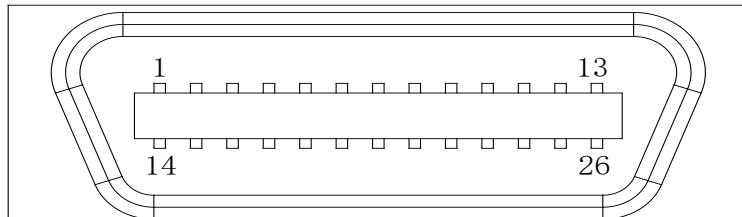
Soldering terminal of XS3 Spindle Motor Input interface plug (looking from the soldering terminal)
